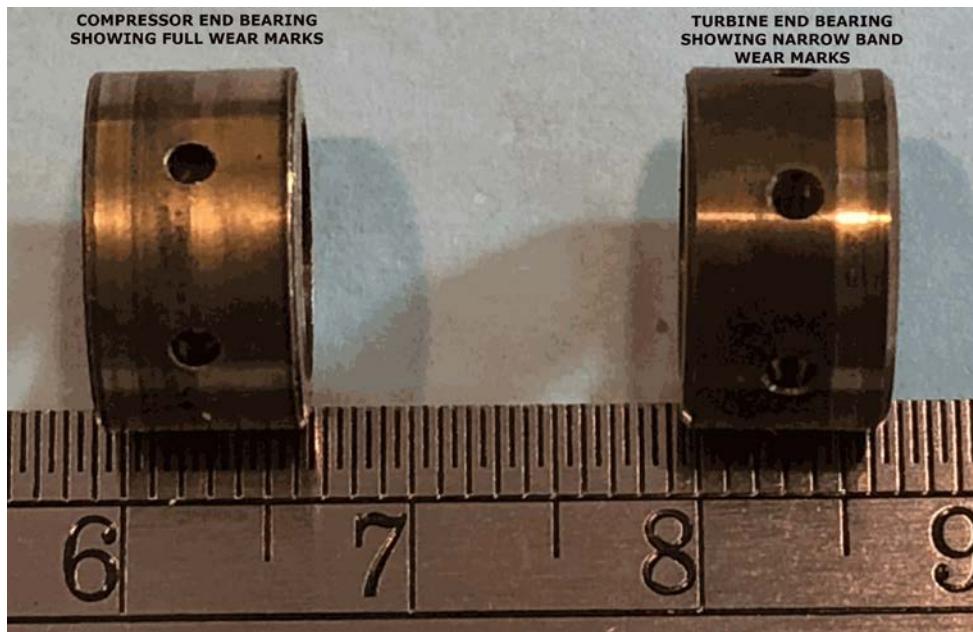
Comparison of Compressor and Turbine Bush Bearings
